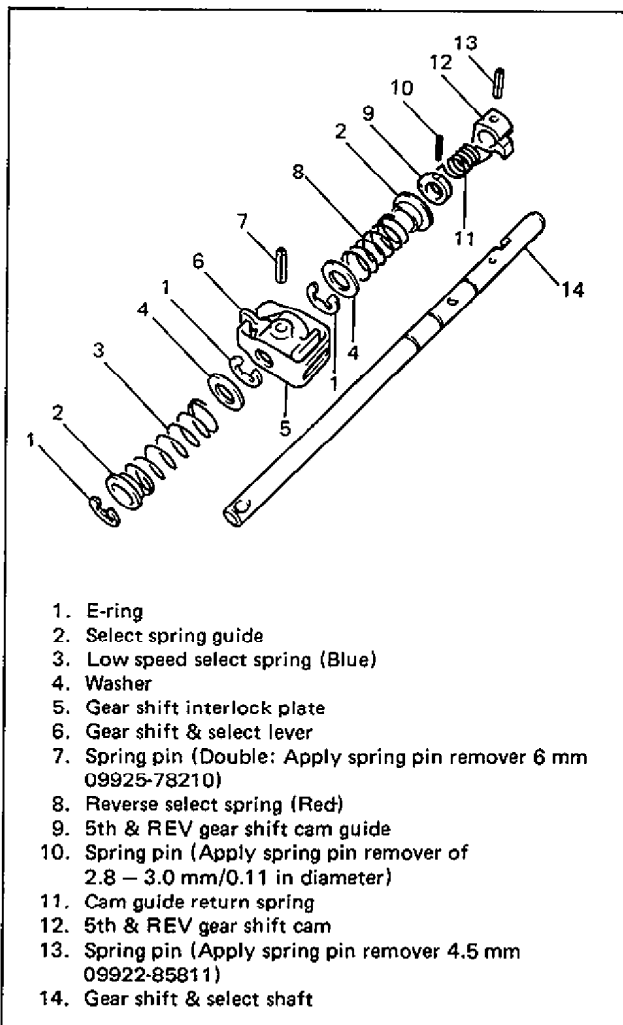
A-70 Gear Shift & Select Shaft Assembly
